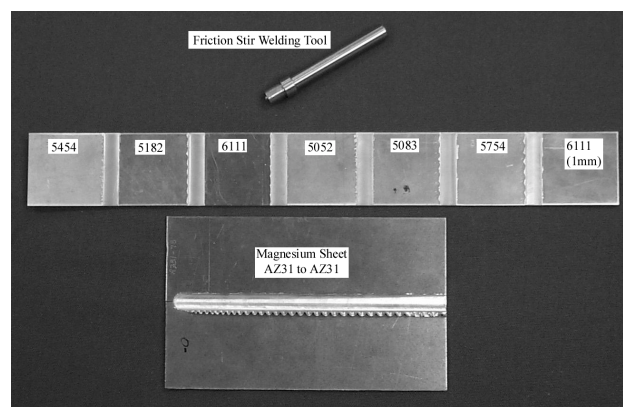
A friction stir welding tool together with dissimilar aluminum and magnesium welds
